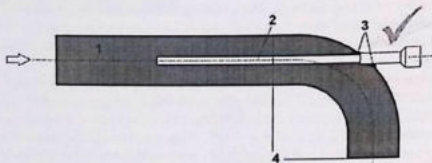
To avoid dead areas, the pocket for the temperature probe (2) may be welded in the product flow (1) through the pipeline. Attention should be given to the quality of the weld (3), which must be smooth and continuous. Welding of the temperature probe into the bend may be done off-line, after which the bend can be built permanently (by welding) or with dismantable joints into the piping system. In the latter case, the bend section is detachable (4) (Lelieveld et al., 2003; Hauser et al., 2007).
